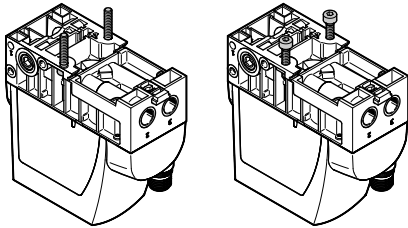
Mounting via bottom of valve with M4 screws/M4 screws and square nuts
